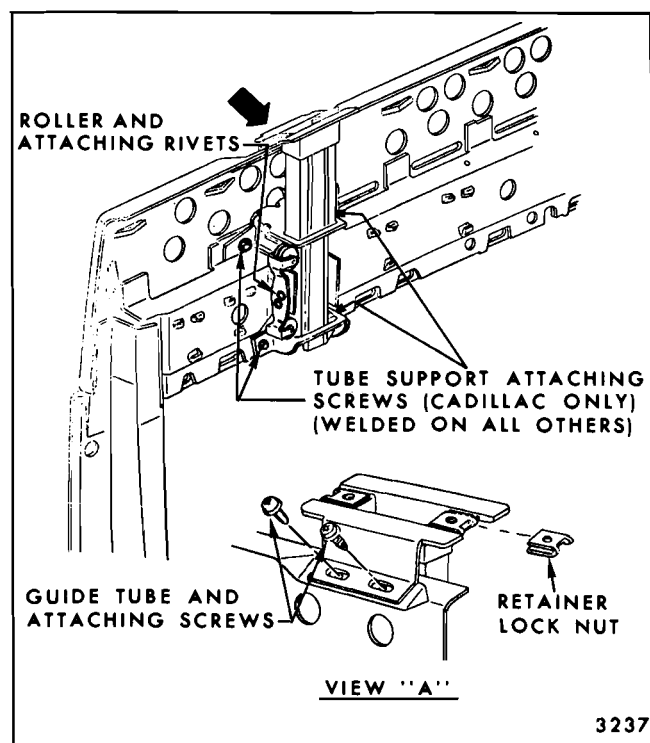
Head Restraint Guide Tube and Roller Typical of All Standard Seats Except Cadillac
